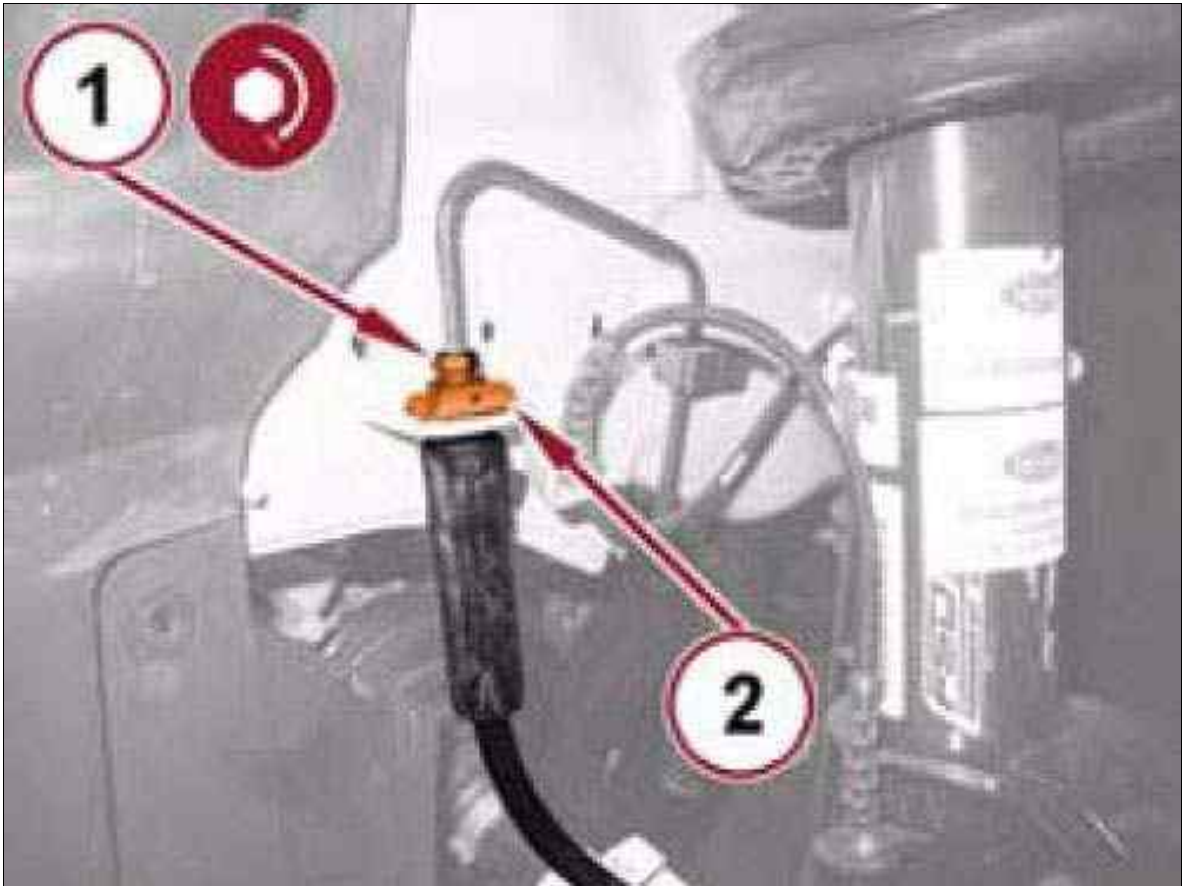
Brake Hose, Nut & Strut Retainer Spring
